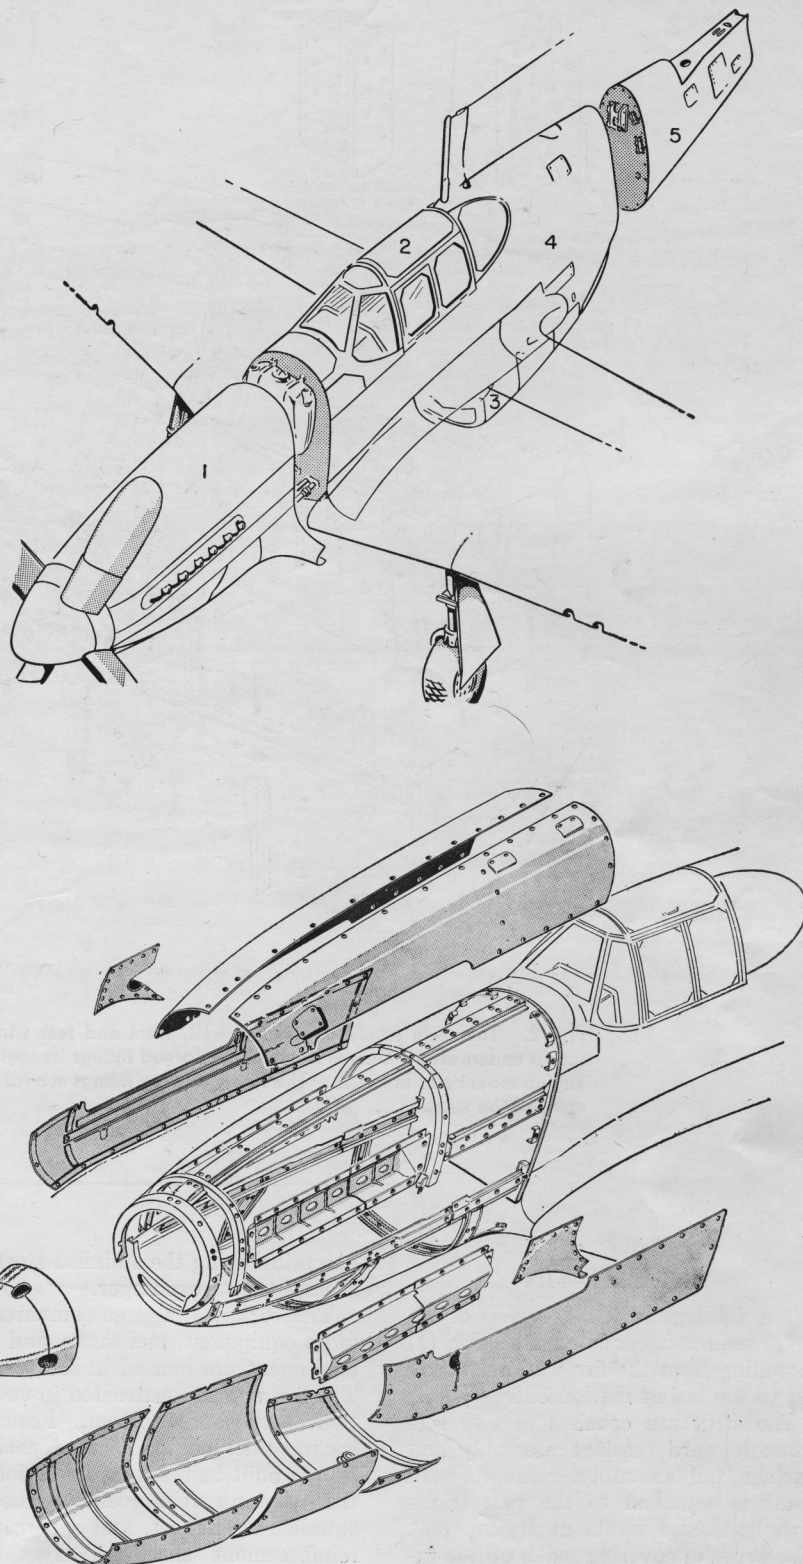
Above: (1) Engine section; (2) cockpit enclosure; (3) radiator air scoop; (4) main fuselage section; (5) rear fuselage section. Below: Exploded drawing of the engine cowling and framework.
